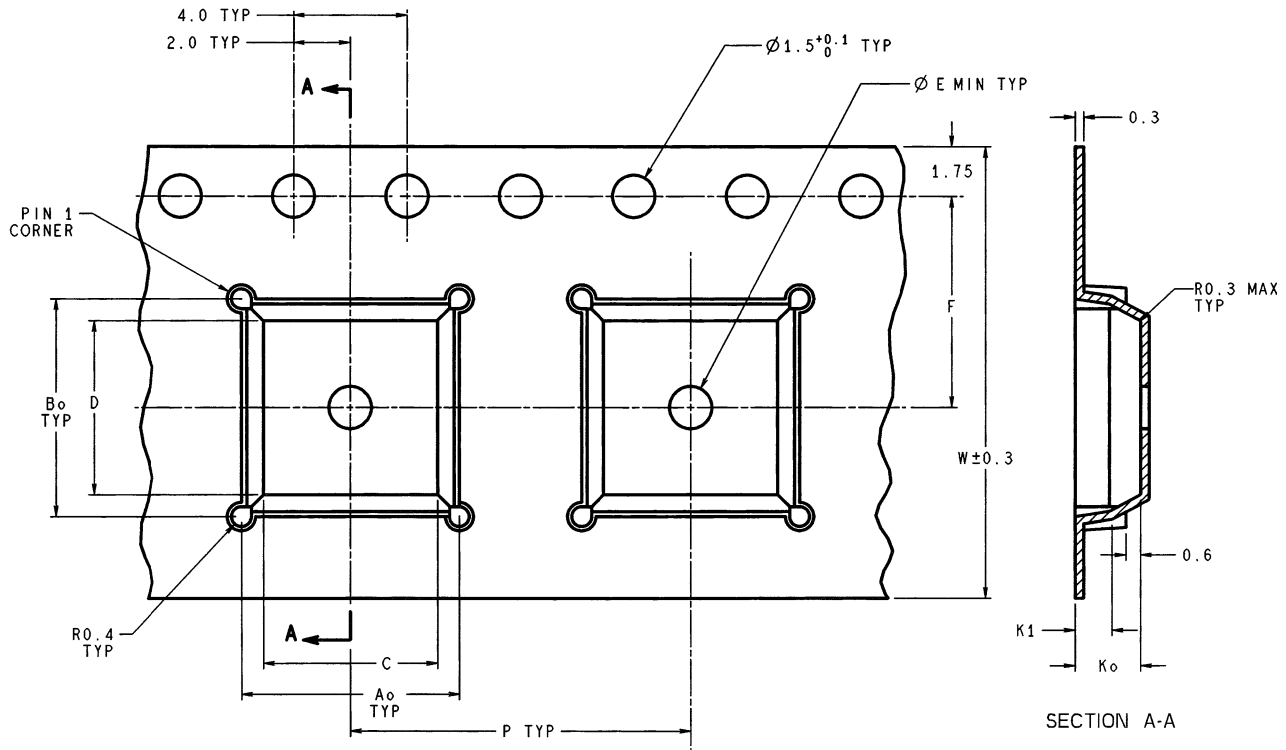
Tape and Reel for 9x9 LLP. See Table 2 for Dimensions
